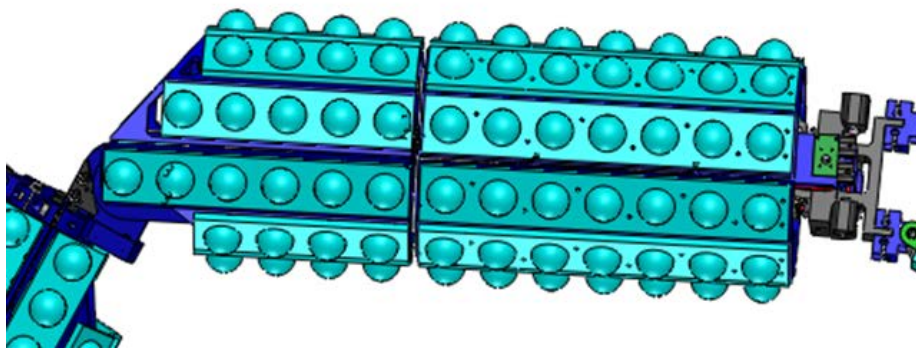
Motor Module/ Upper Arm covered in Tactile Sensors
